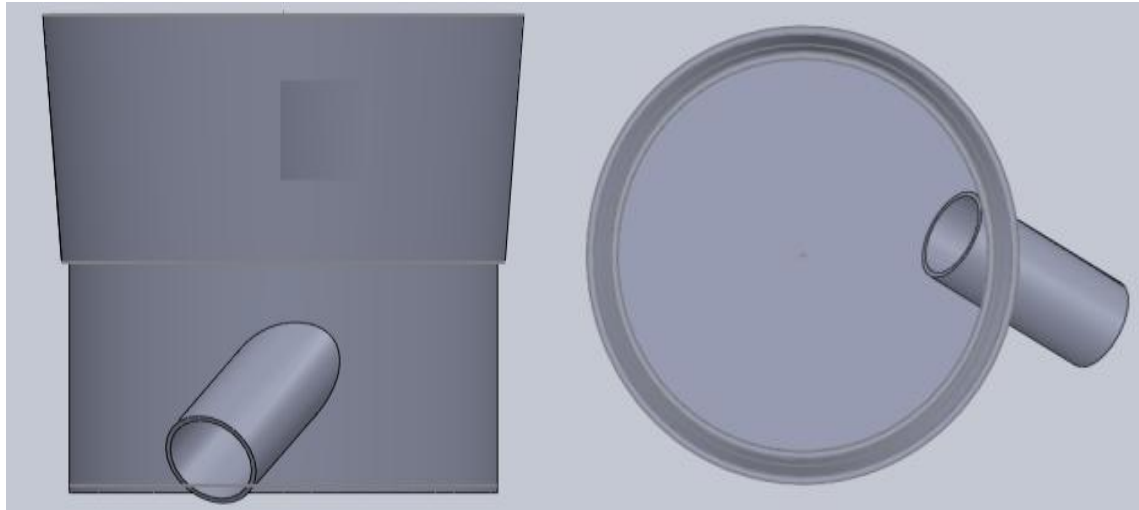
AIR INLET PIPE AT 30 ° TO THE HORIZONTAL AND VERTICAL AXIS
